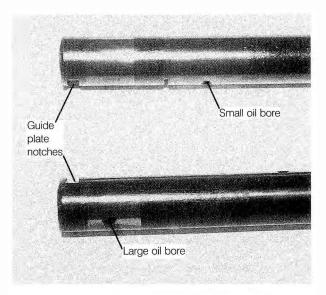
Rocker arm shafts showing notches for front guide plate and oil bores.
